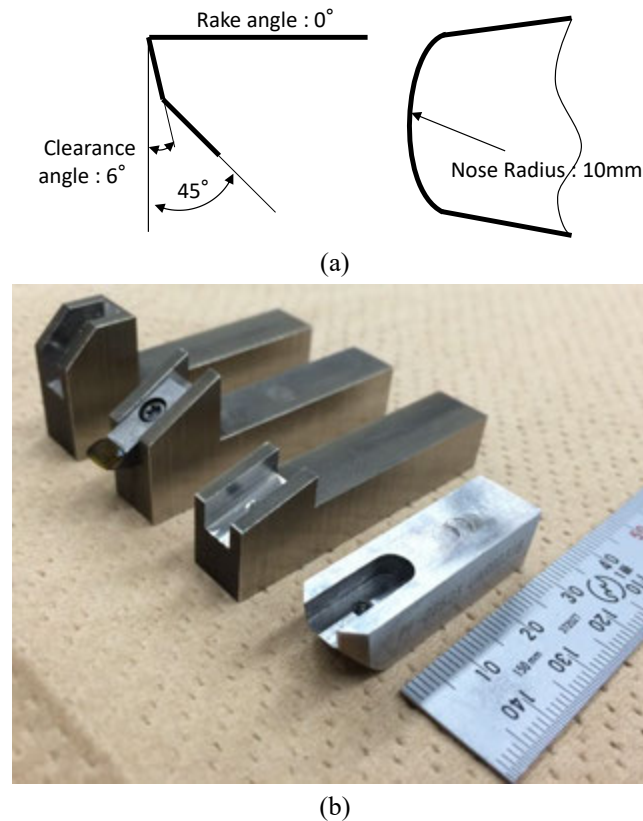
(a) Tool insert geometry, (b) Tool holders for rake angle adjustment
